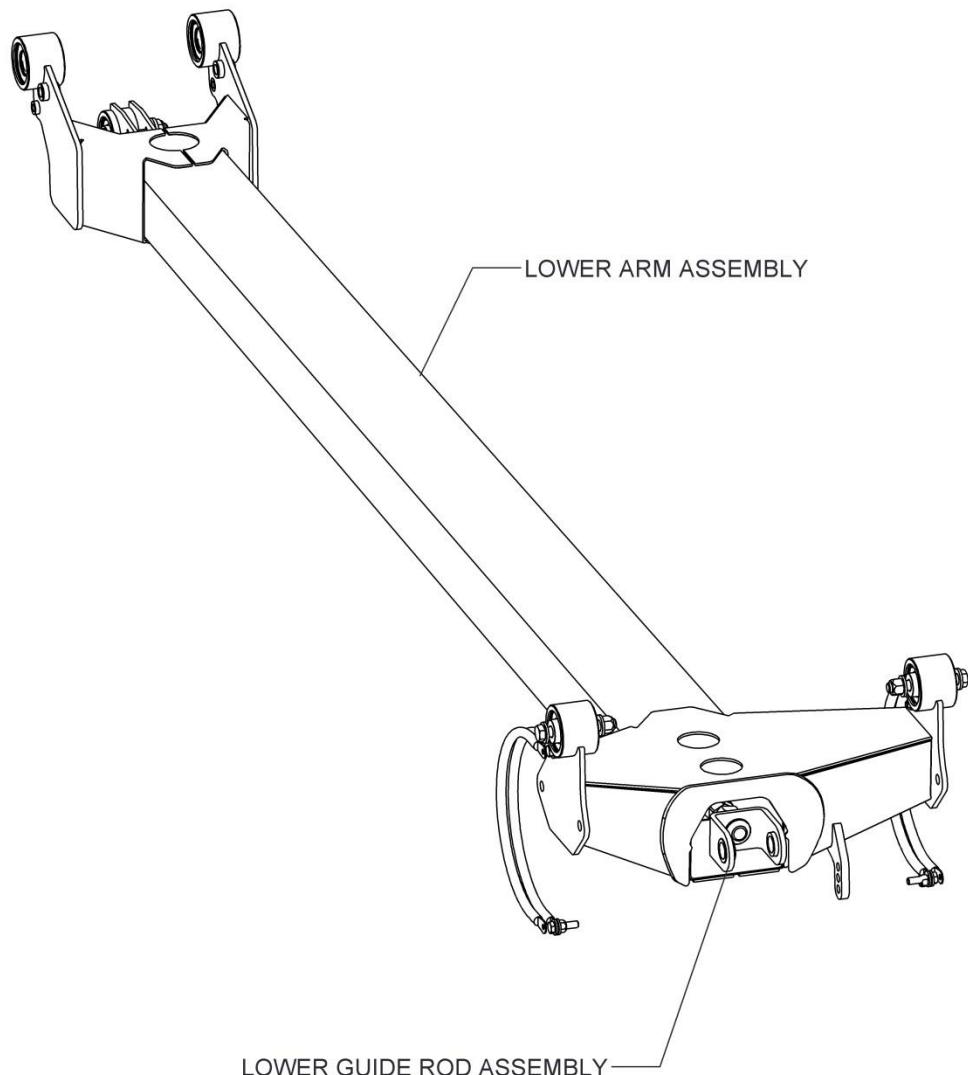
Lower Arm Lower Guide Rod Assembly
